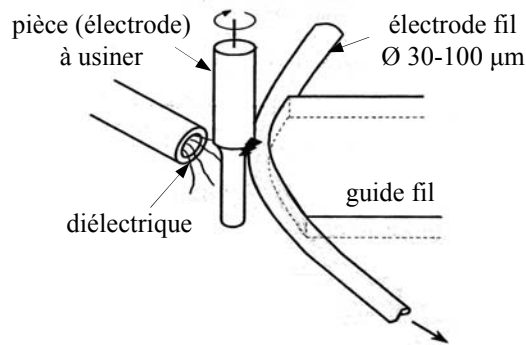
Wire Electrical Discharge Grinding (WEDG)
